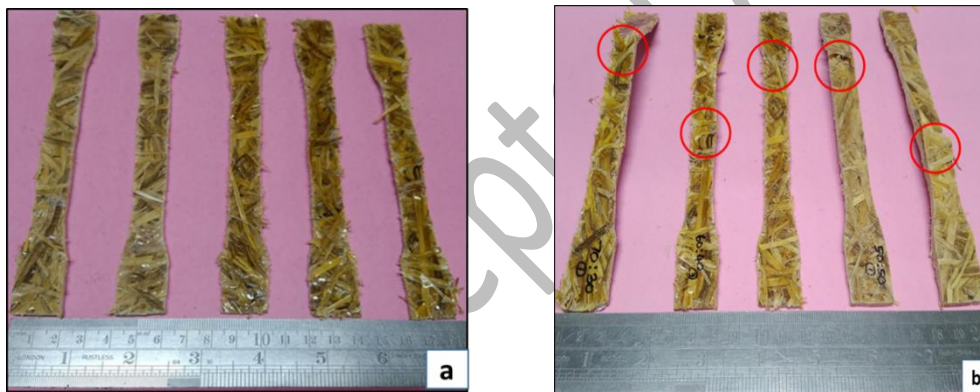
(a,b): Photographic images of tensile test before and after fractured specimens
